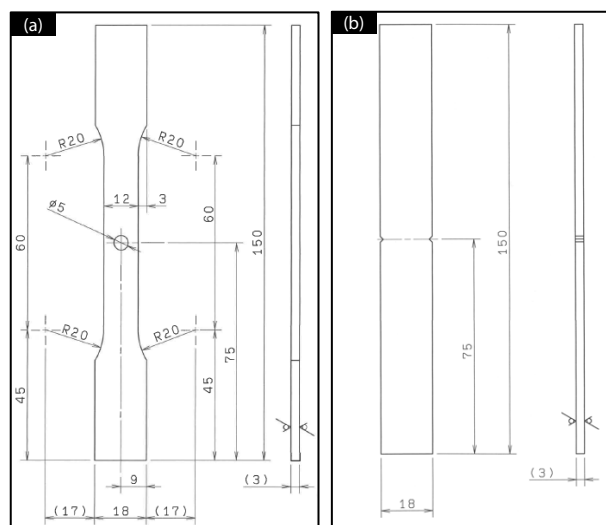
Details of Test Piece Geometry (Unit: mm)
